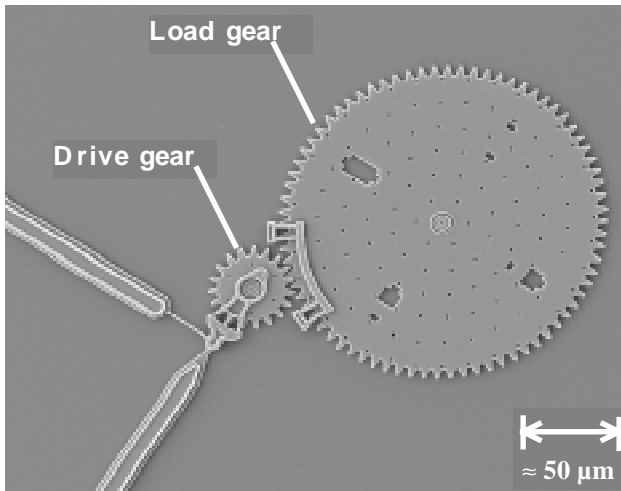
The microengine drive gear shown with the load gear. The right bracket () shaped guide on the load gear mitigates out-of-plane wobble to ensure proper meshing of teeth.
